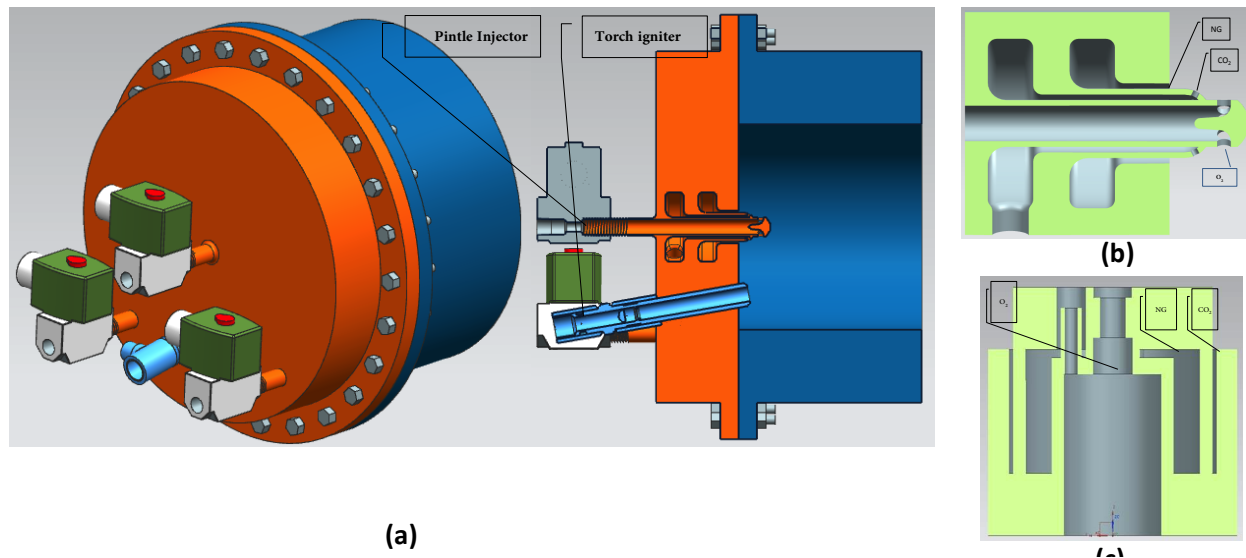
a) Power-head showing injector, valves, and igniter systems b) modified pintle injector c) modified shear coaxial injector
